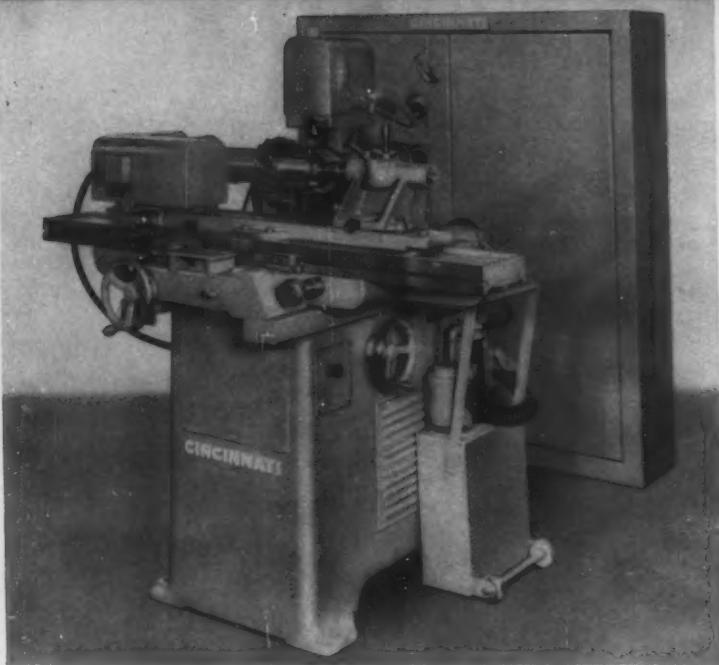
Cincinnati automatic cutter grinder with wheel-truing attachment
